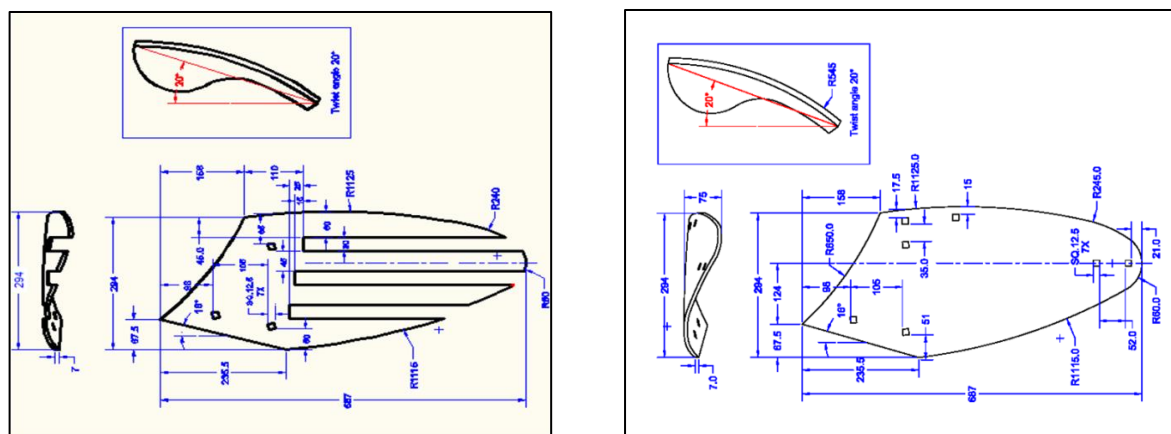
Illustrated slatted and standard-conventional moldboards (top-left and top-right), respectively; and design blueprint of slatted (bottom-left) and conventional (bottom-right) moldboards.
